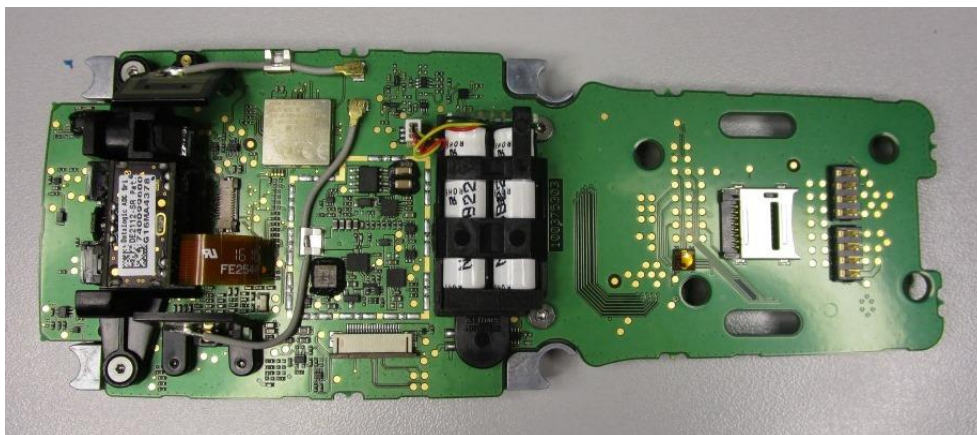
SKORPIO X4 – Internal PCB Overview-Bottom Side
